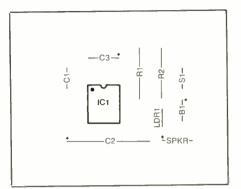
Wiring guide for pc board. Use this as a rough guide to component layout when assembling project on perforated board.
